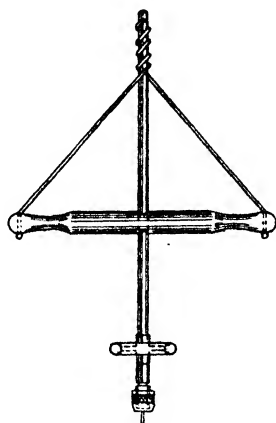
Drill used by jewellers for the drilling of fine holes
